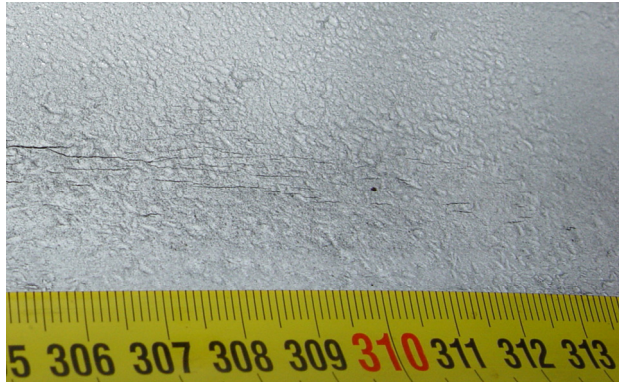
Corrosion cracks at shaft to flange radius
